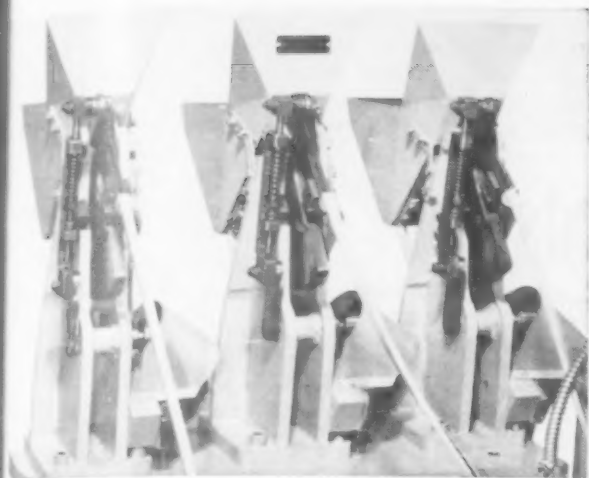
In the reciprocating leaf arrangement shown above the leaf rises by straight line or rotation, and in so doing will pick up some parts which are in position. Adapted to large, heavy parts.
